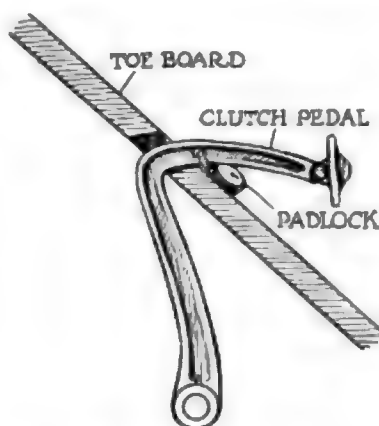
Another method of locking a car. The padlock holds the clutch engaged.
